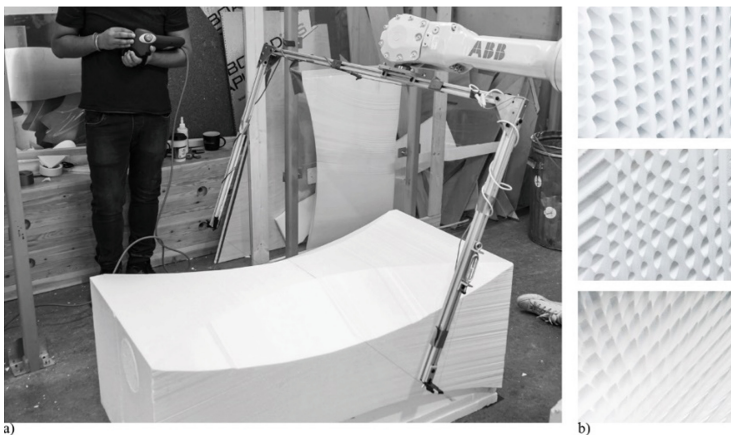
a) Custom built adjustable T-slot robot mounted hot-wire cutter b) various lighting and textural effects from different cut angles and frequency
